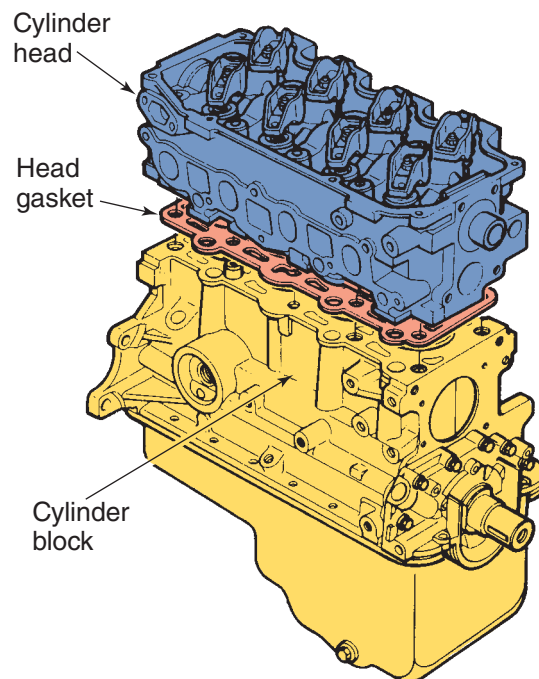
The two major units of an engine, the cylinder block and the cylinder head, are sealed together with a gasket and are bolted together.
